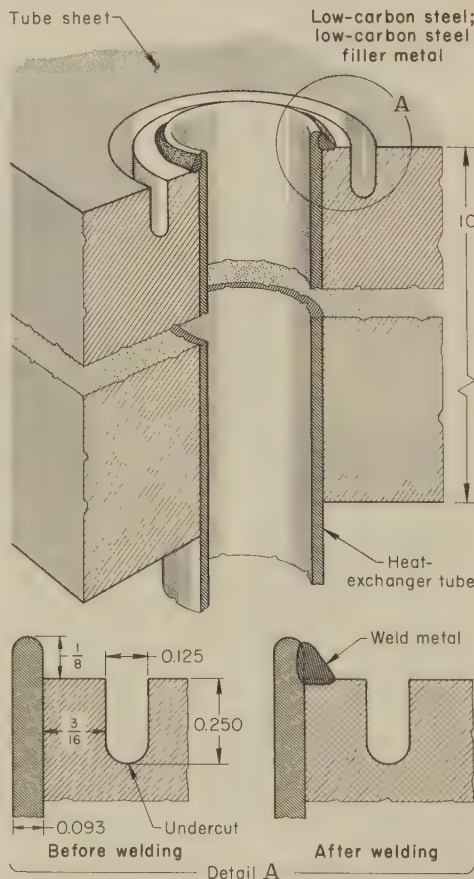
Thick tube sheet with machined groove for minimizing heat-sink differential during welding of the thin-wall heat-exchanger tube to the tube sheet
